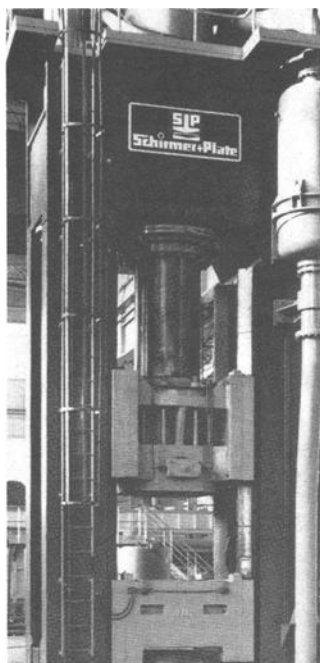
A 40-MN (4000 metric ton) piercing press for forged tubes. (Courtesy of Schirmer-Plate-Siempelkamp Hydraulic Presses.)
